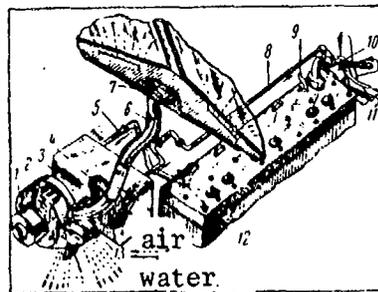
ZIL-157K Cabin Heater: 1, electric motor; 2, centrifugal fan; 3, cover; 4, radiator; 5, intake line; 6, hose; 7, distributor; 8, feed line; 9, hose delivering water to compressor; 10, water pump; 11, hose returning water from compressor; 12, valve; 13, fan body; 14, fan body valve
